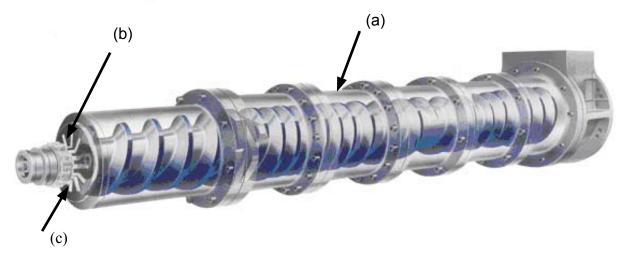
The actual extruder: the principal component is the rotary propeller (a). At the end of the propeller sits the extrusion die (b). A rotating blade (c) cuts the product hanks to the required size.
